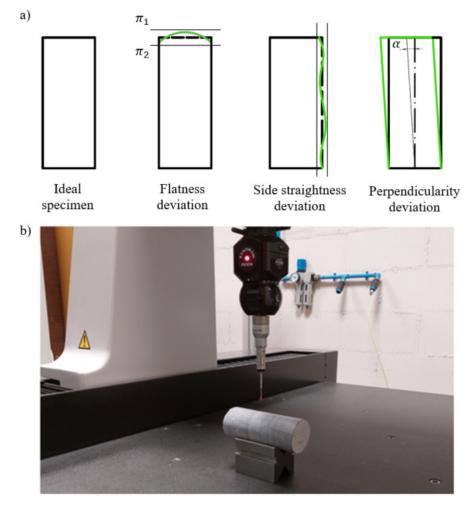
Specimen geometries used (a) and coordinate measuring machine during the geometrical inspection process (b).
